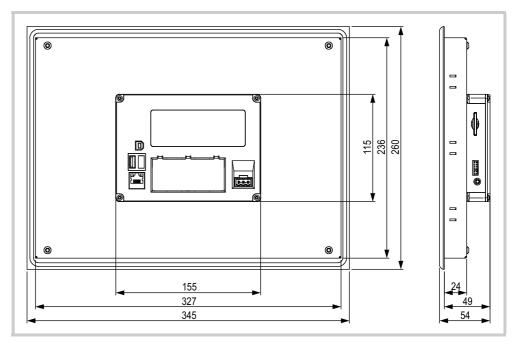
Mechanical dimensions of the 10.4" devices in mm
